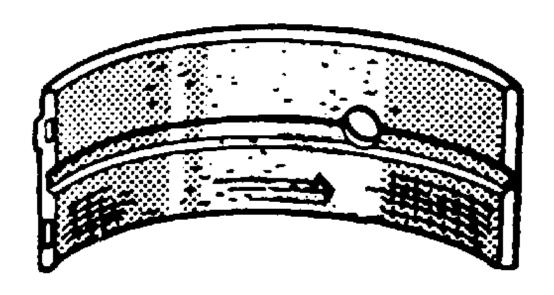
Identifying Connecting Rod Bearing Scoring Or Discoloration Courtesy of GENERAL MOTORS CORP.
